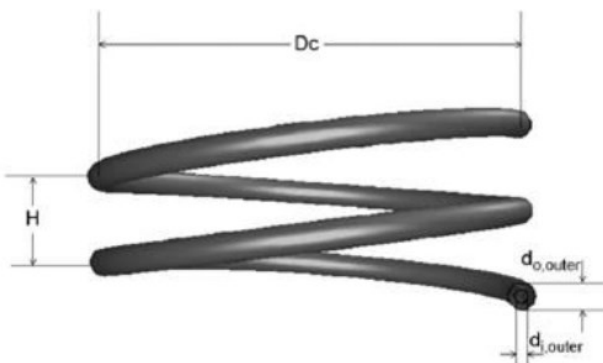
Dimensional Representation of Tube-in-tube Helical Coil Heat exchanger
